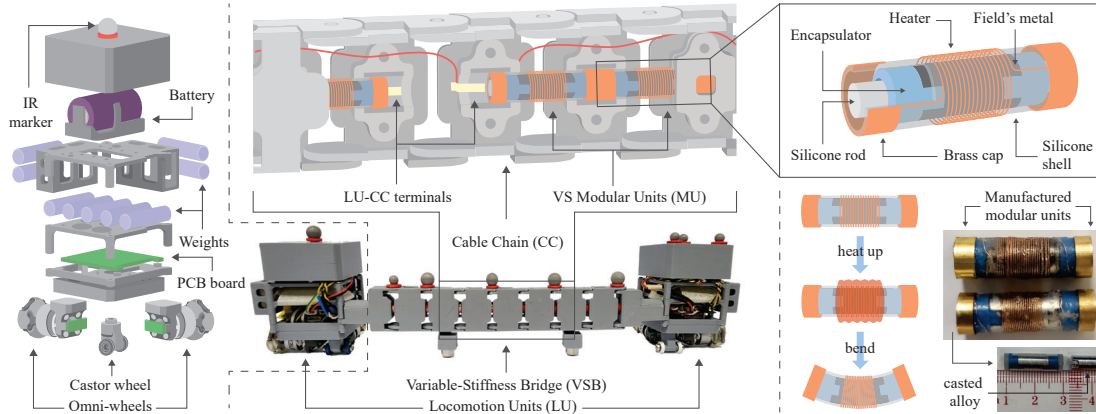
Structural overview of the upgraded 2SR robot: exploded view of the locomotion unit showing its internal architecture; composition of the assembled variable-stiffness (VS) bridge with modular units forming a cable chain backbone; detailed view of a single VS modular unit showing its components and operating principle; photographs of manufactured components including the cast alloy layer and fully assembled module.
